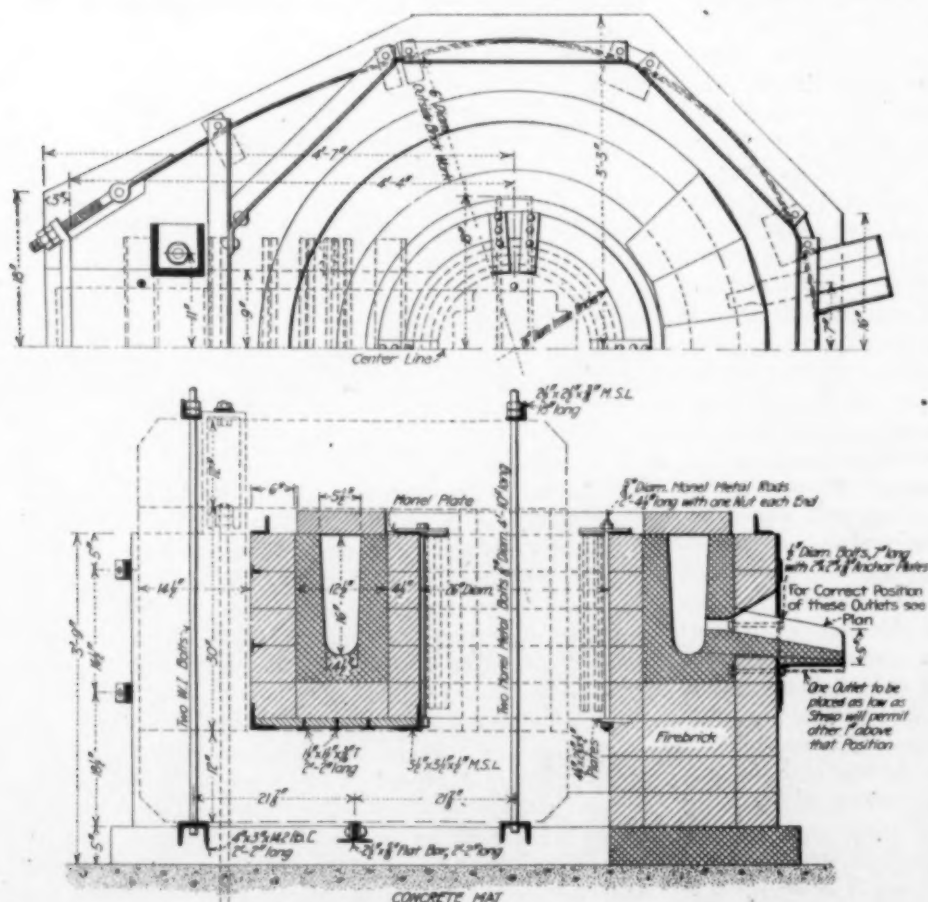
PLAN AND SECTIONAL ELEVATION OF KJELLIN FURNACE
